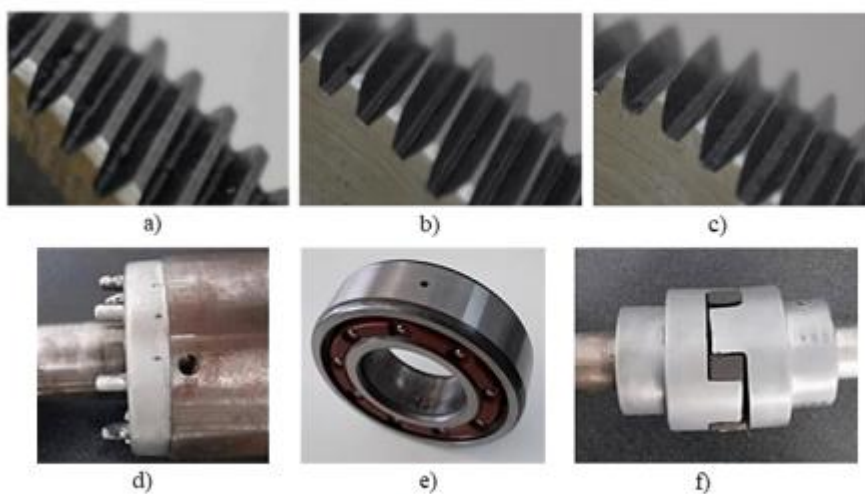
Mechanical elements. (a) Healthy gear; (b) gear with 50% wear; (c) gear with 75% wear; (d) one broken bar; (e) outer bearing; and (f) misalignment.
